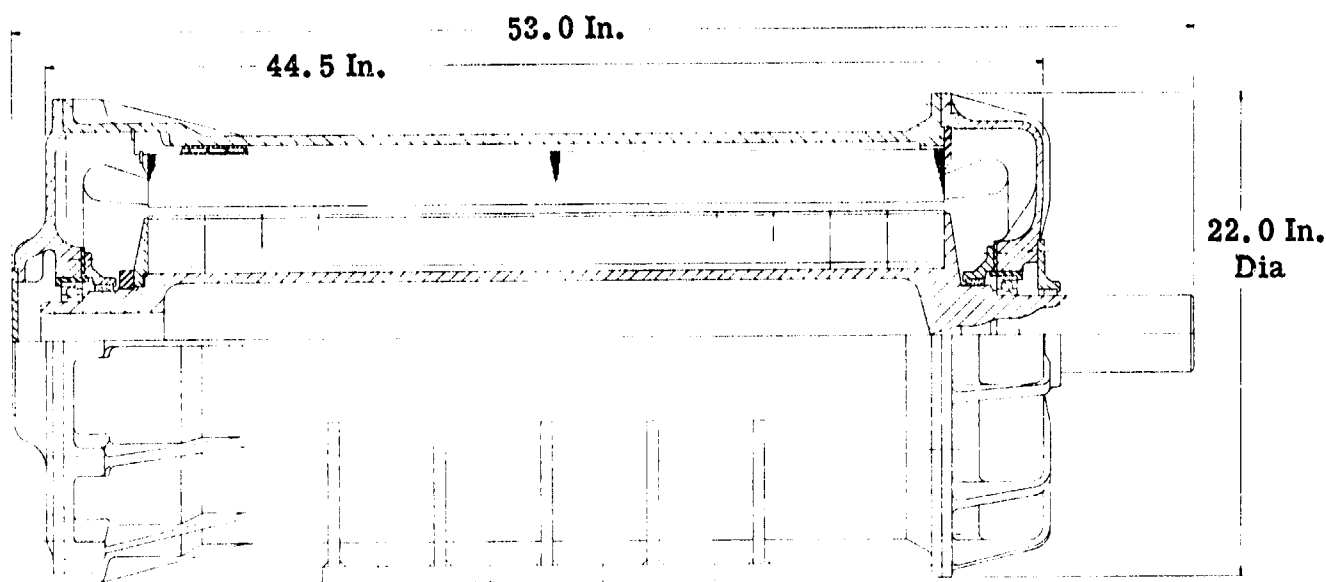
Permanent Magnet, 5000-hp, 7200-rpm Generator
